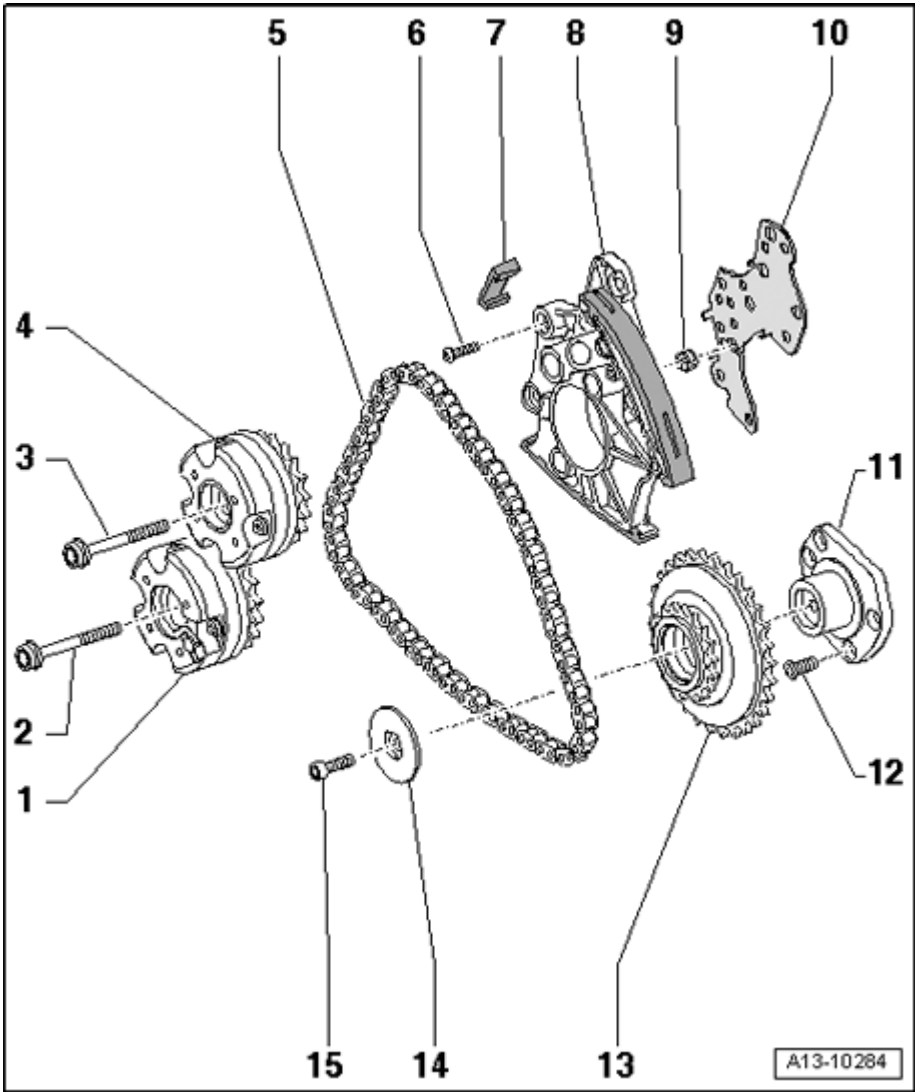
Camshaft Timing Chain, Assembly Overview (Left Camshaft Timing Chain)
